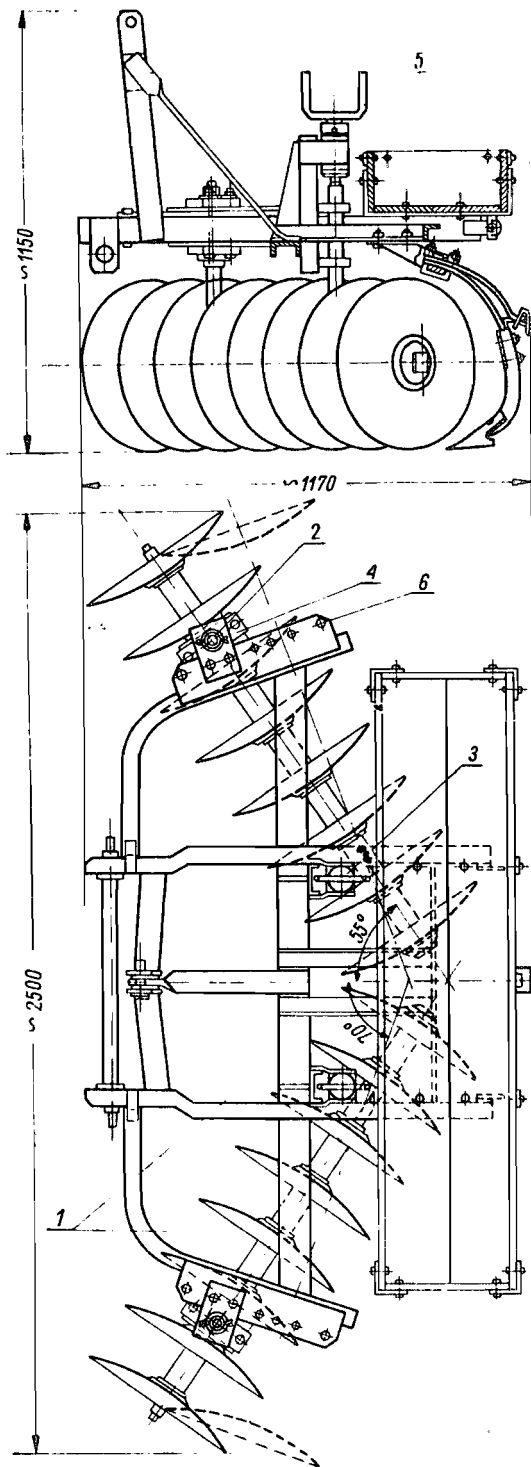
Single-action mounted disk harrow: 1 — frame with mounting column; 2 — vertical shaft; 3 — regulated vertical shaft; 4 — shaft bearing; 5 — controlling crank for section leveling; 6 — control of angle of section setting.
